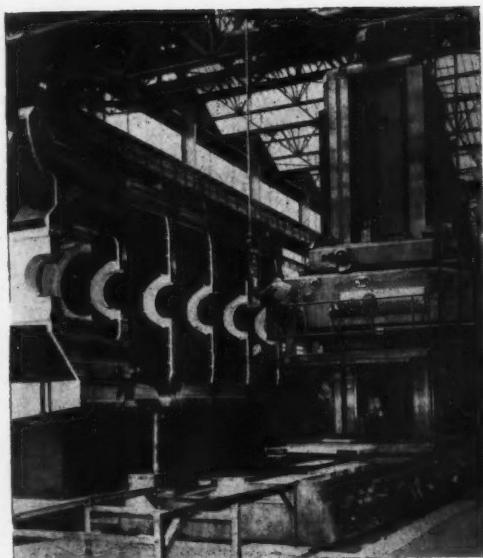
At this set-up on a C.W.B.-Innocenti machine, facing and boring operations are carried out on a diesel engine bed plate
